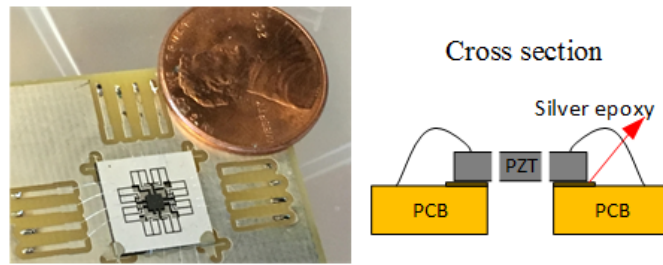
Fabricated bulk PZT gyroscope bonded onto a custom PCB. Cross section of the assembly is also shown.
